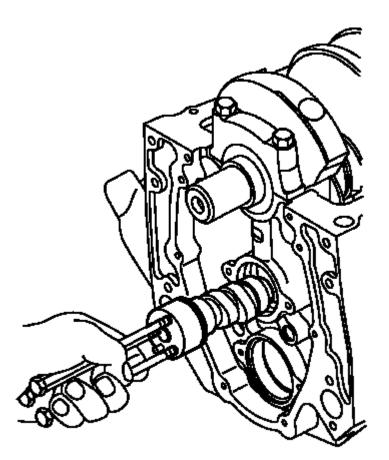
View Of 5/16-18 X 4.0 Inch Bolts Installed Into Front Of Camshaft Courtesy of GENERAL MOTORS CORP.
